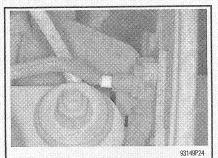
The sensor is bolted through the back of the plate on the rear wheels, and is held in place by an external Torx®head bolt. The same as the front
